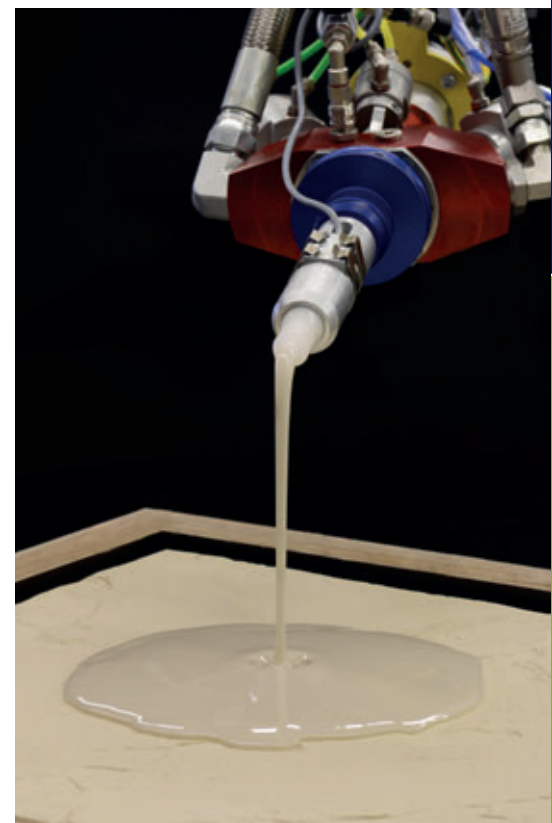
Mixing head of a flow-rate-controlled PU processing machine
